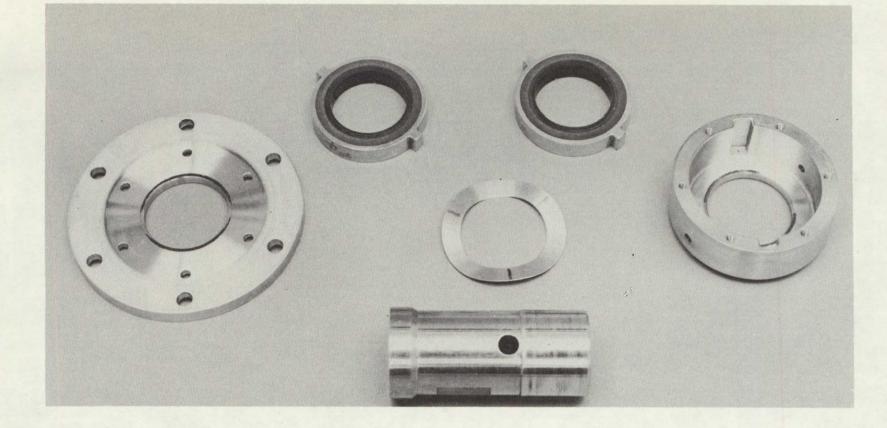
Helium Seal Assembly (RS009690X, S/N 05, Build 14, Posttest 749)
